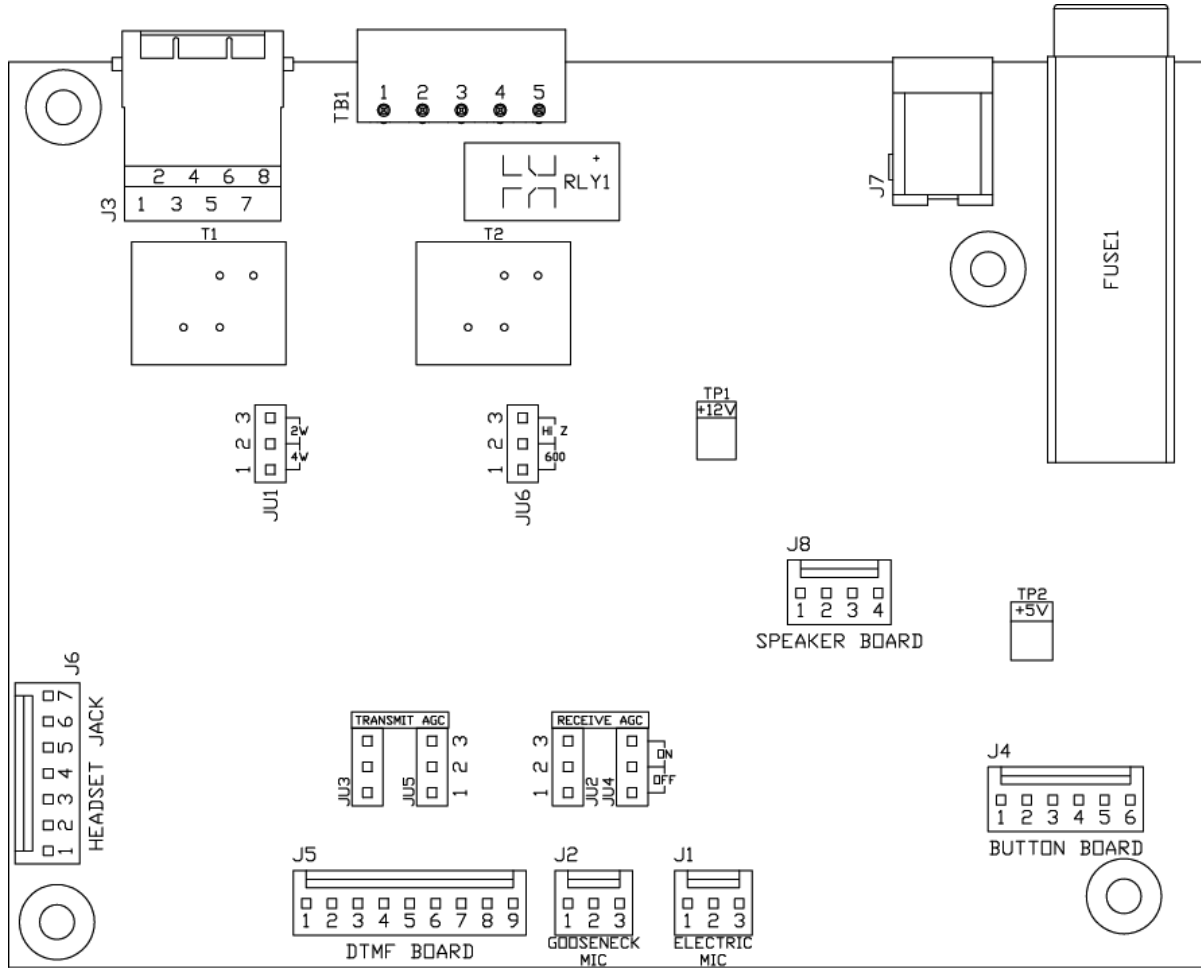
MAIN CIRCUIT BOARD, TOP VIEW
